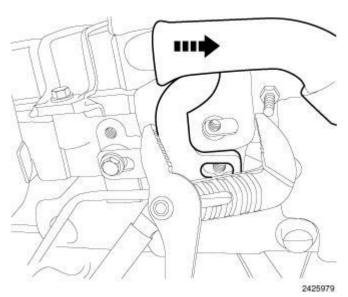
Using Channel Lock Pliers To Separate Top Connection Of Front Coolant Tube From EGR Cooler
